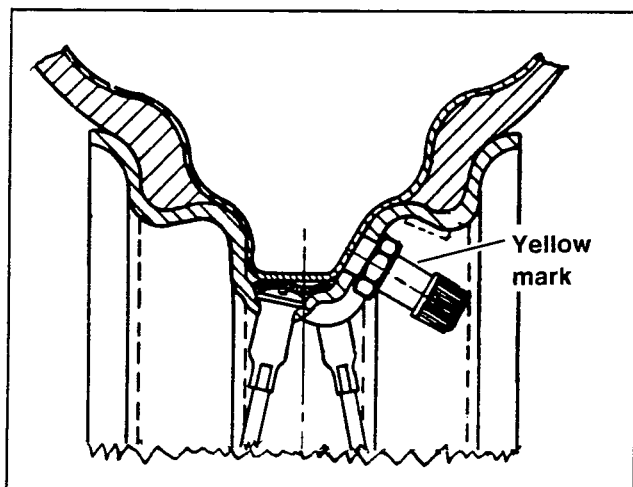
Inner Tube (16 in.) Valve Stem Marking
